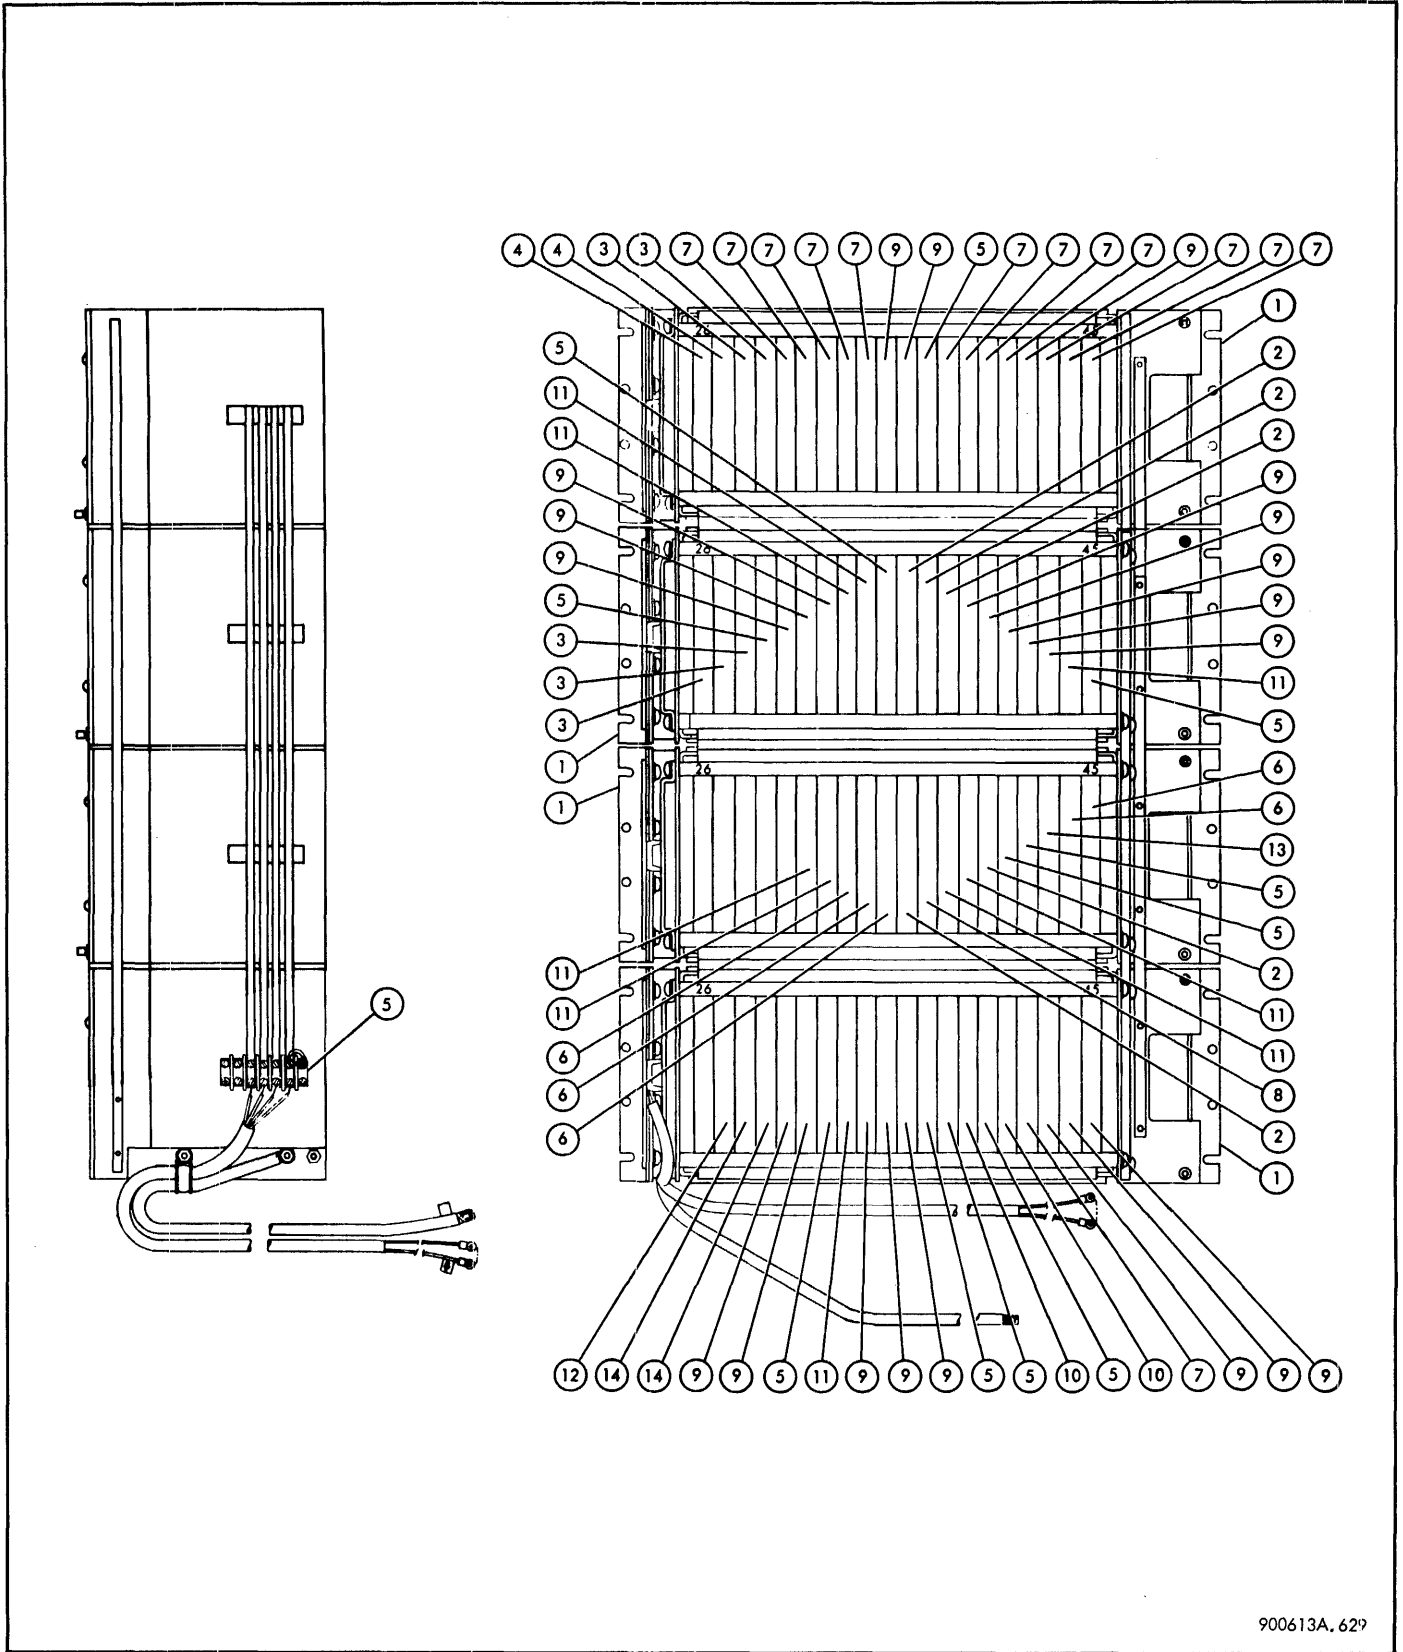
Cable Plug Printed Wiring Board Parts Location
